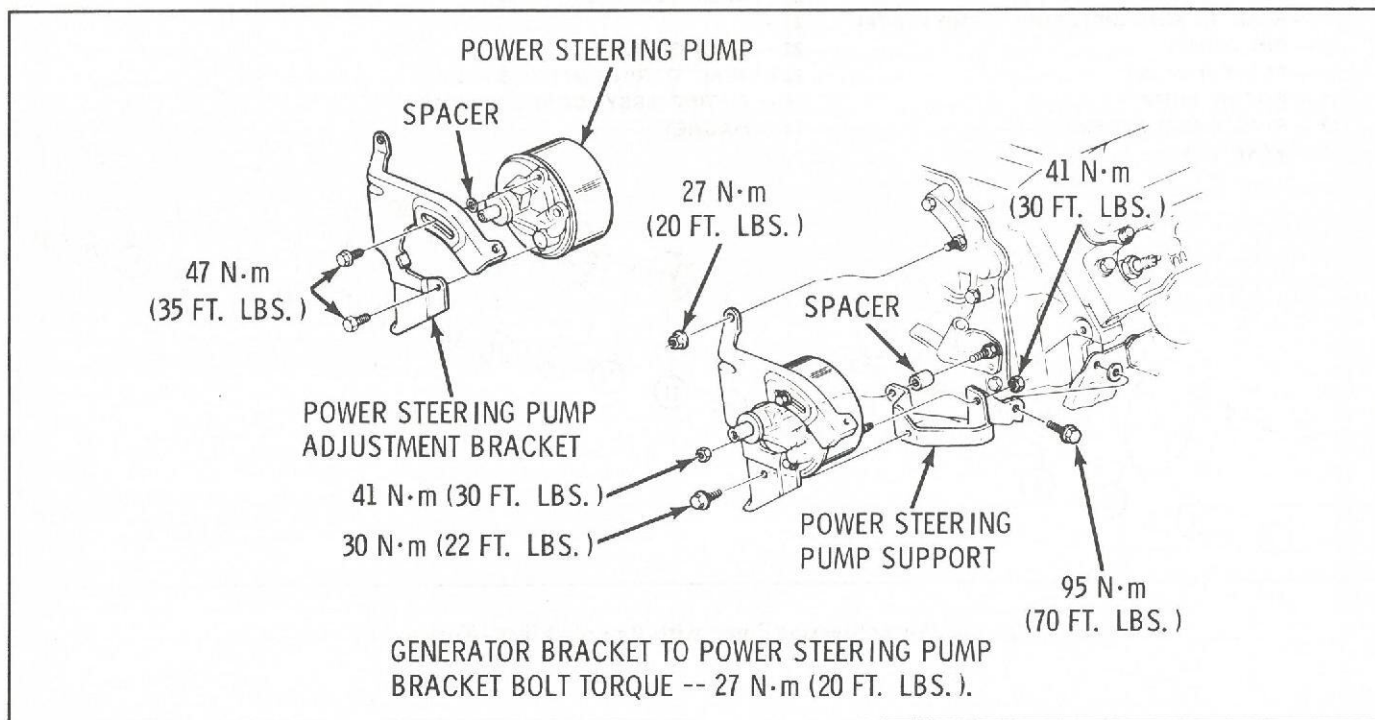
Power Steering Pump Mounting - Toronado with 5.0L V-8
